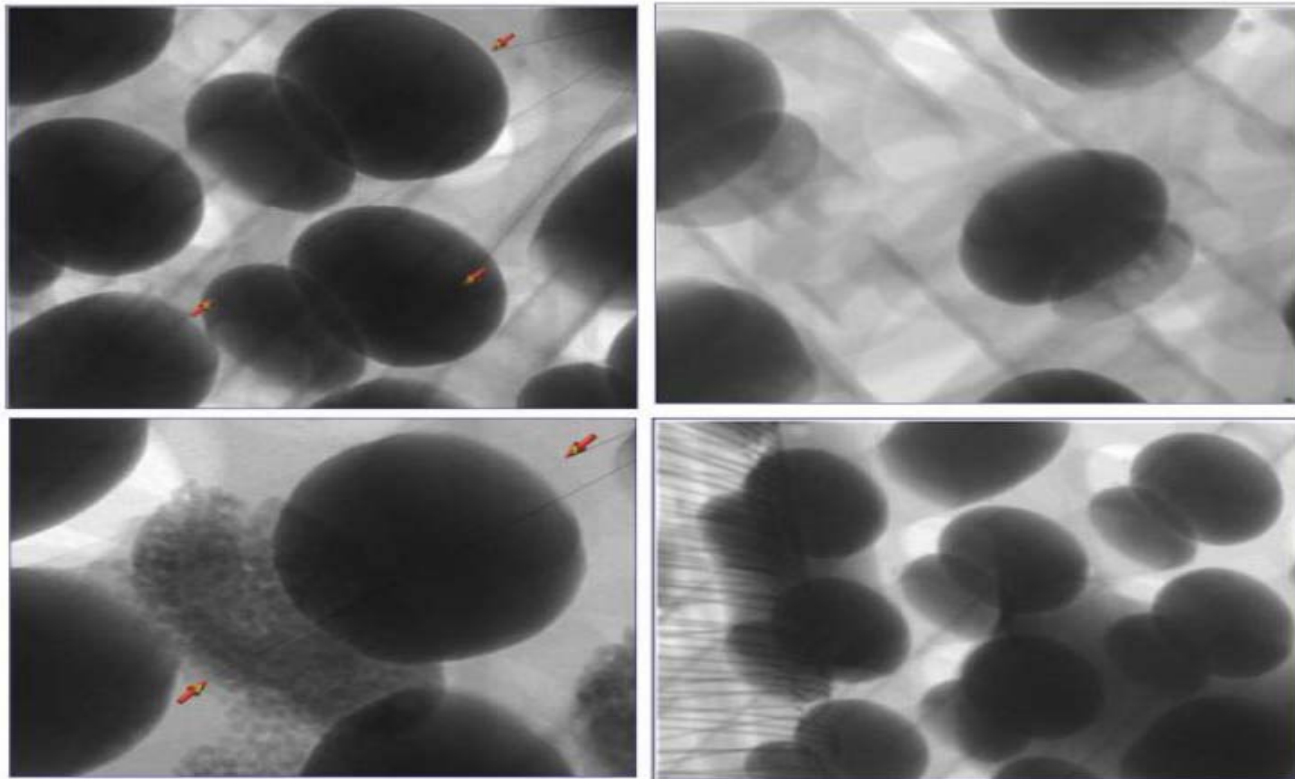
Various examples of HOP defects easily identifiable with off-axis 2D X-Ray inspection
